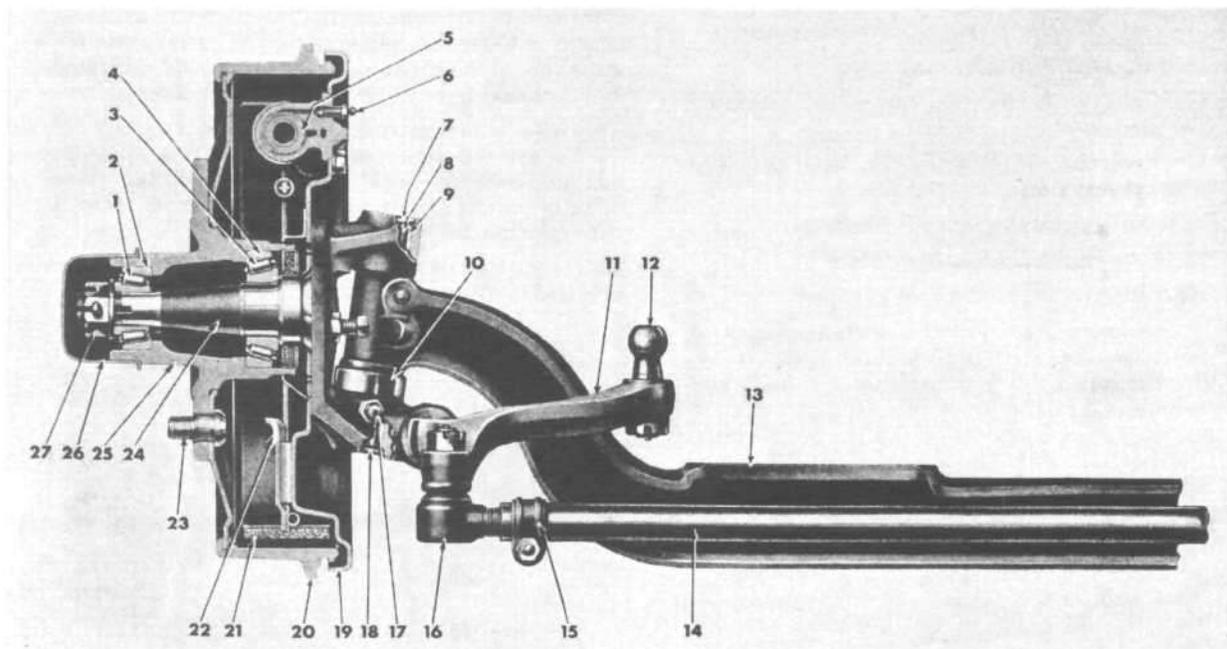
FRONT AXLE—2-WHEEL-DRIVE MODELS
